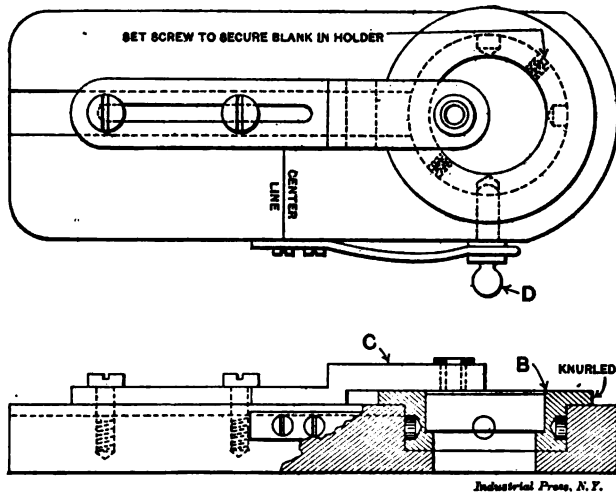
Adjustable Jig for Drilling Threading Dies.
